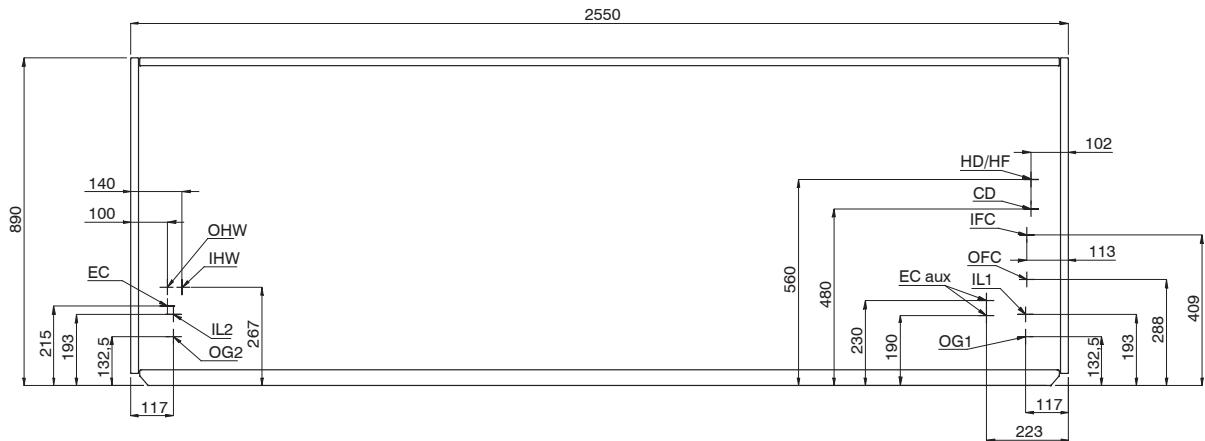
n Refrigerant, water and electrical connections PX 068-082-094-104-120 W-F-H, top view
